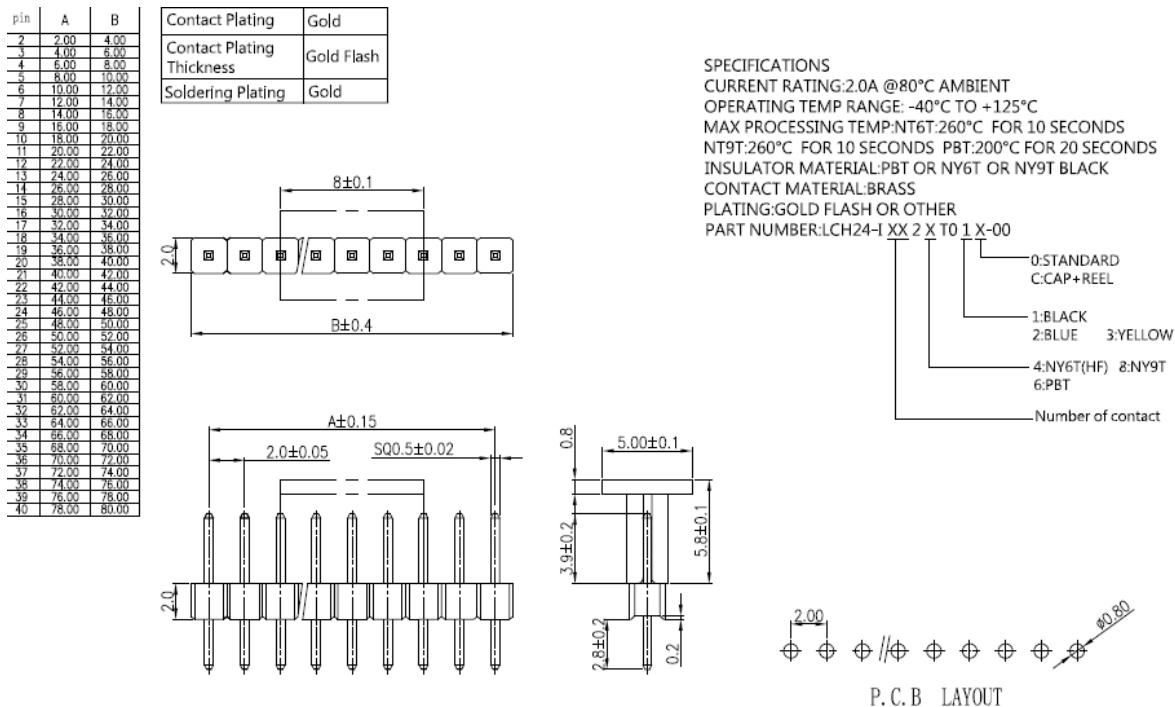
Pin Header DIP 1*2P Drawing (J2/J3)
